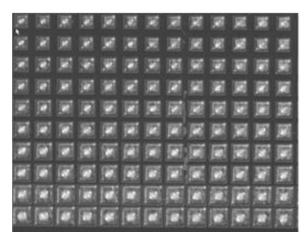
2-D view of the solder paste deposits from the SPI for TE PCB
